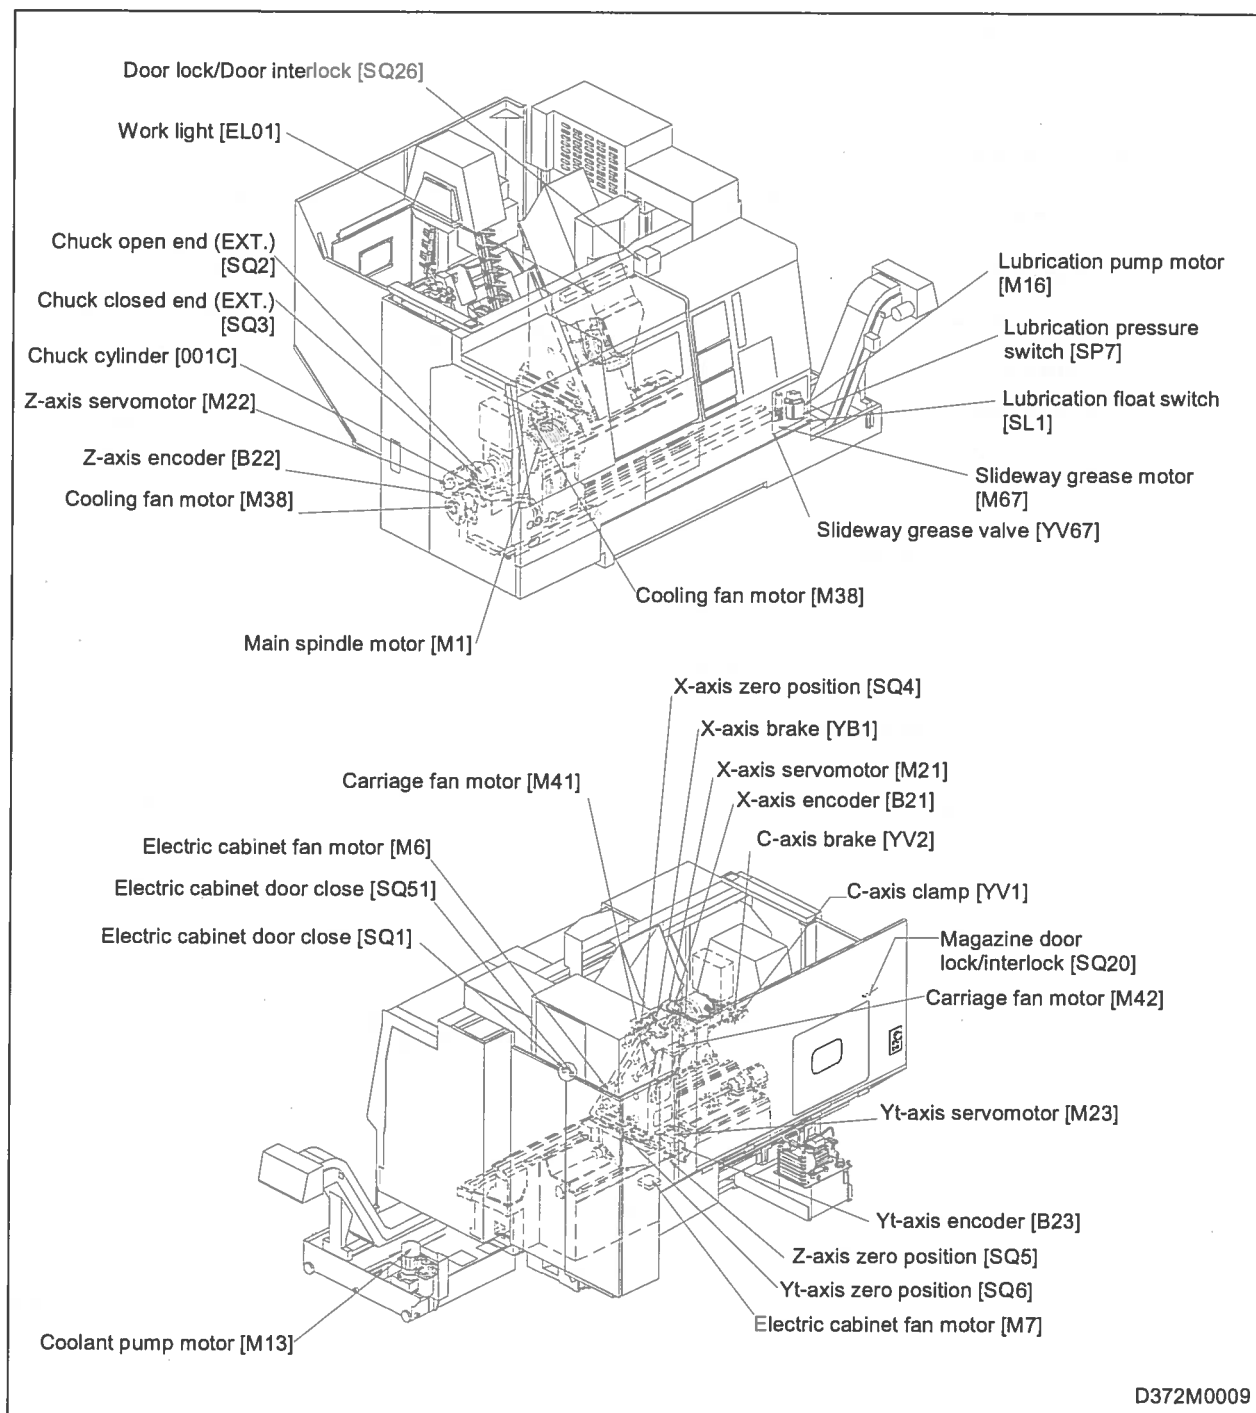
Equipment layout (INTEGREX 100-III – without tailstock –) [20/40-tool magazine]
